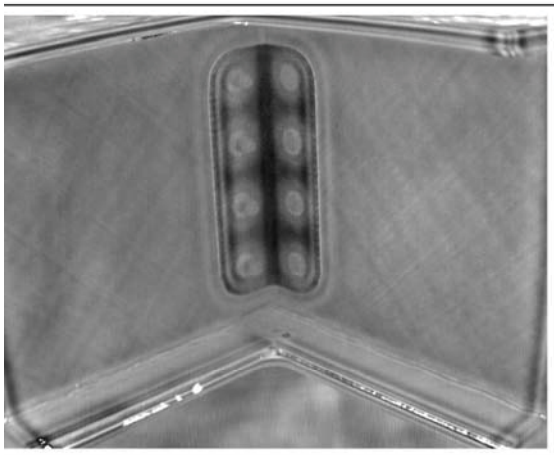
Thermal inspection results for cruciform 2, rivet 2 bottom.
